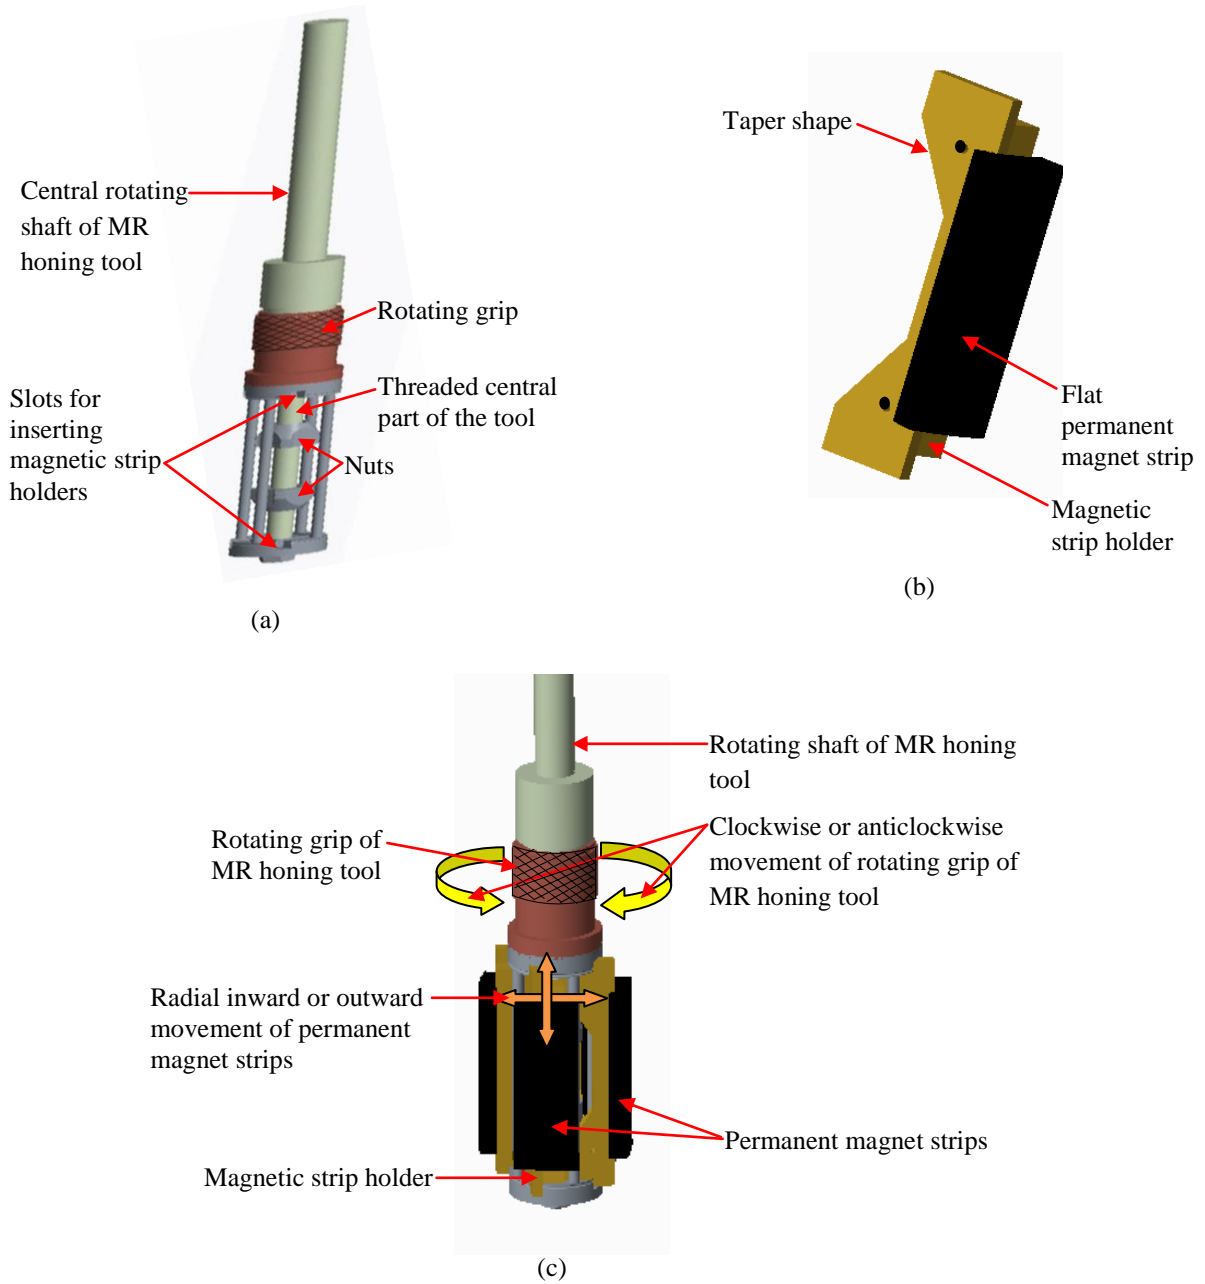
Three dimensional computer-aided design model of (a) magnetorheological honing tool structure with the central rotating shaft, (b) magnetic strip holder for gripping the flat permanent magnet strip and (c) complete magnetorheological honing tool along with rotating shaft showing the movement of permanent magnet strips with the rotation of rotating grip in MR honing tool.
